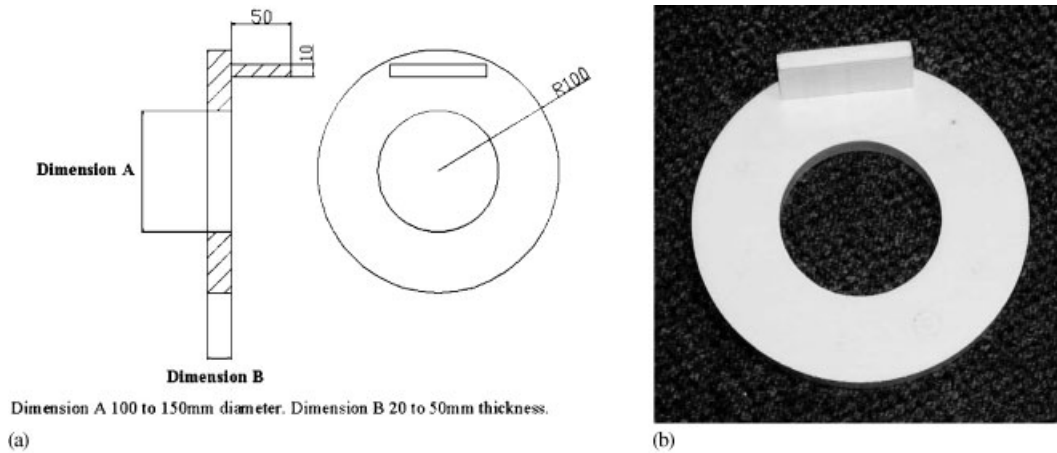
3D test of moulding process: (a) design of the test casting; and (b) the foam pattern.
